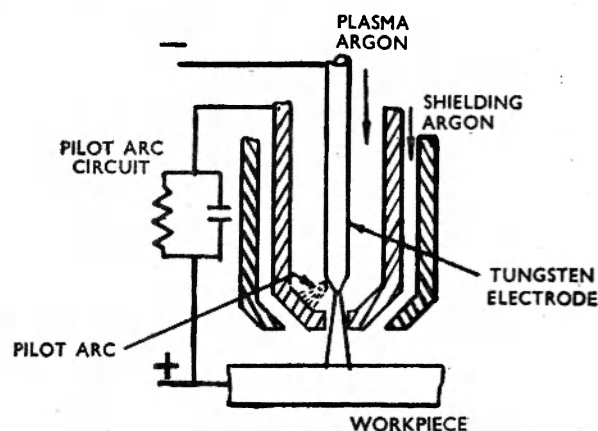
SIMPLIFIED DIAGRAM OF THE PLASMA-ARC WELDING TORCH.
